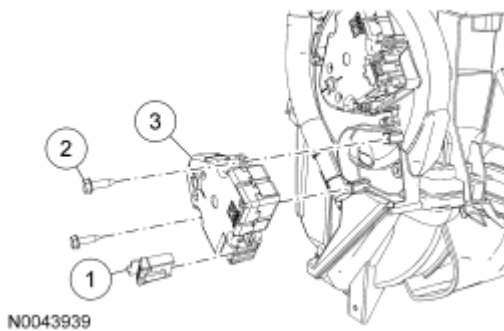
Exploded View Of Temperature Blend Door Actuator - LH
